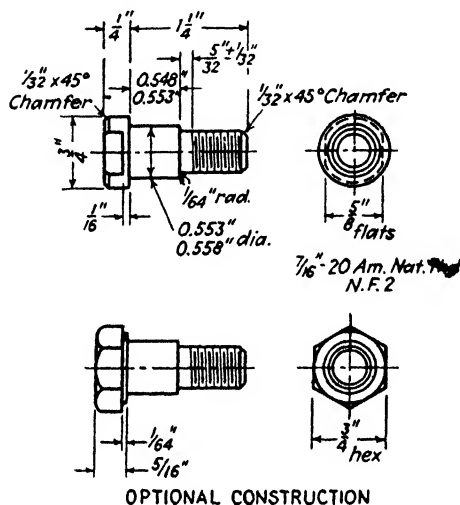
Optional designs of shoulder bolts for cold-heading or screw-machine production. Steel used is S.A.E. 1010, 1112, or X1112.
